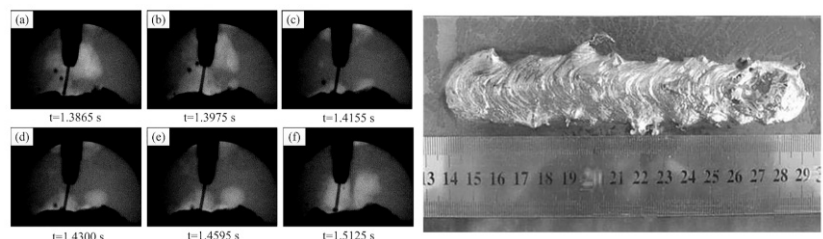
Metal transfer processes of the submerged arc transfer mode and the weld appearance
